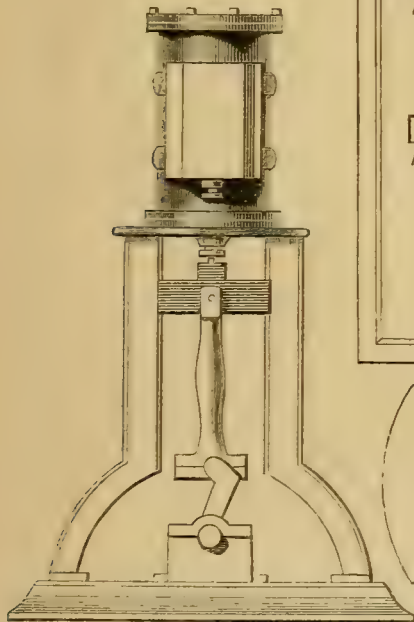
END VIEW OF LAUNCH ENGINE, COMPLETE.
